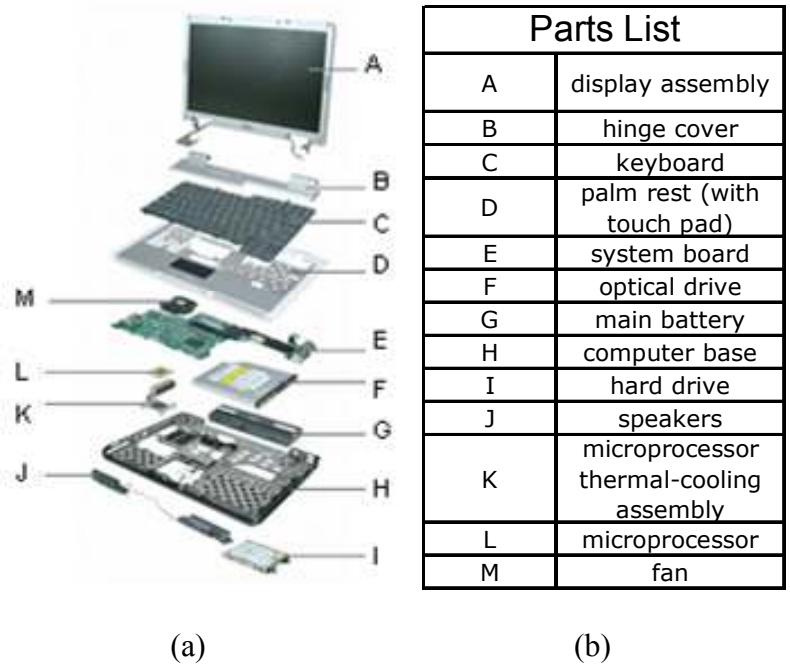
(a) exploded view of laptop and (b) the parts list
